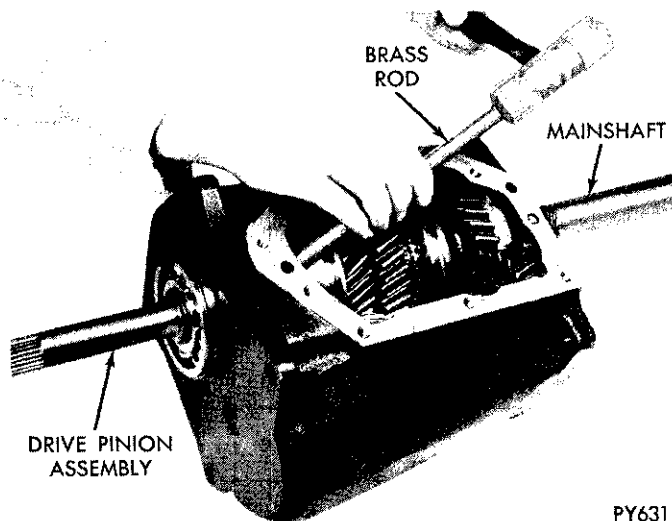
Tap Drive Pinion Forward for Mainshaft Pilot Clearance
